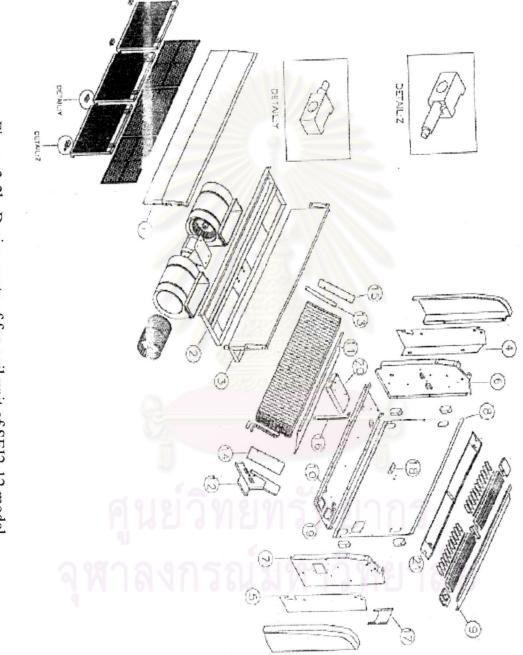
; Design parts of fan coil unit of SFJ2-12 model
